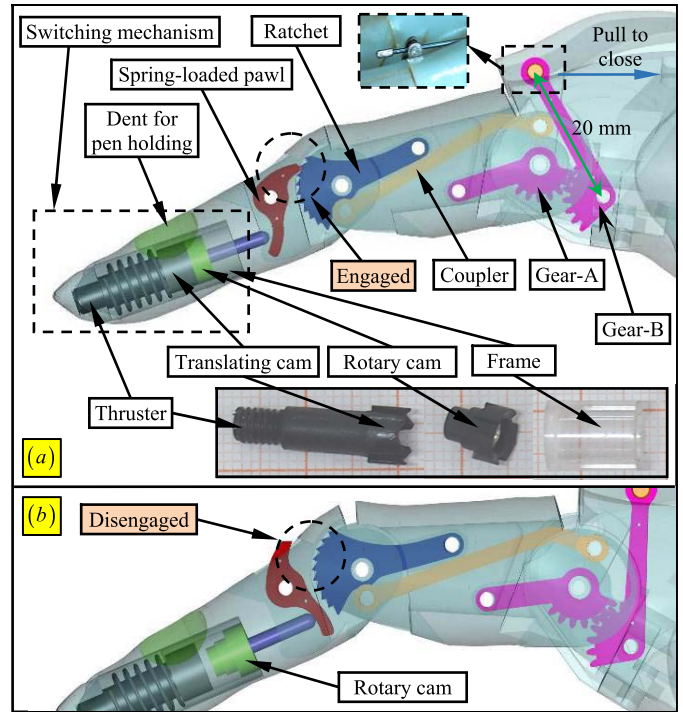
The disengageable ratchet and the gear pair for force magnification: the ratchet (a) engaged and (b) disengaged.
